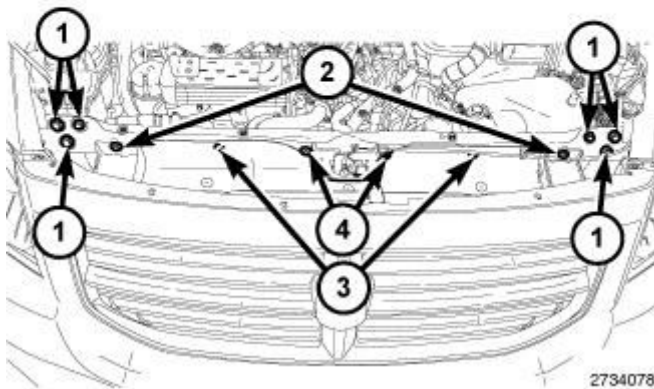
Upper Core Support Seal Push Pins & Radiator Core Support Bolts
